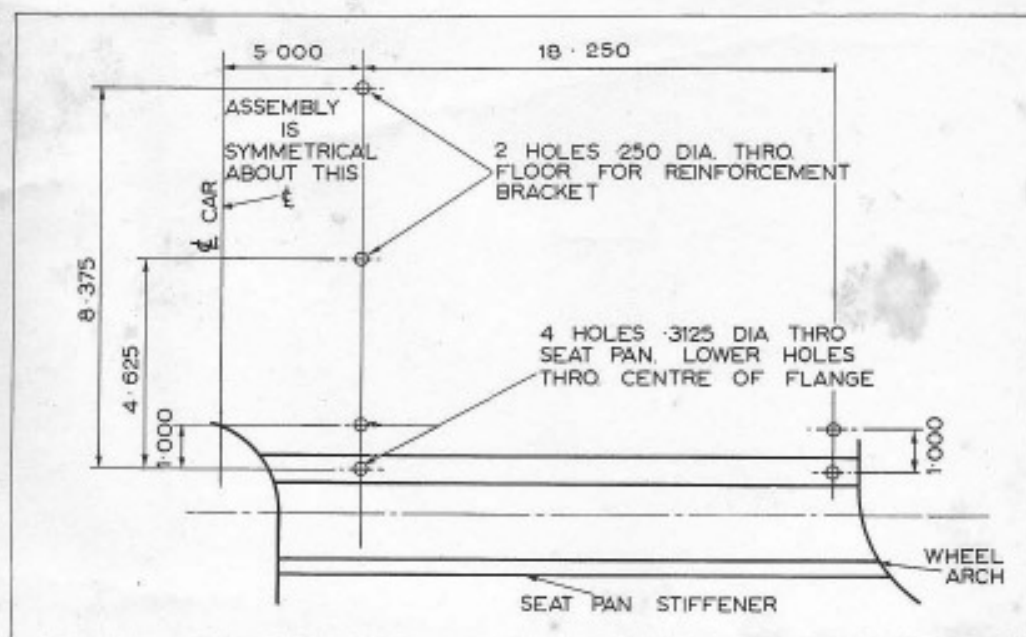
Diagram for drilling holes for rear seat "U" bolts.
